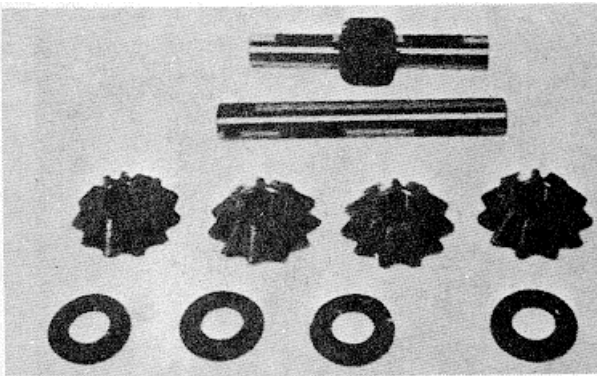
Disassembling Pinion Shaft and Pinion Gears
